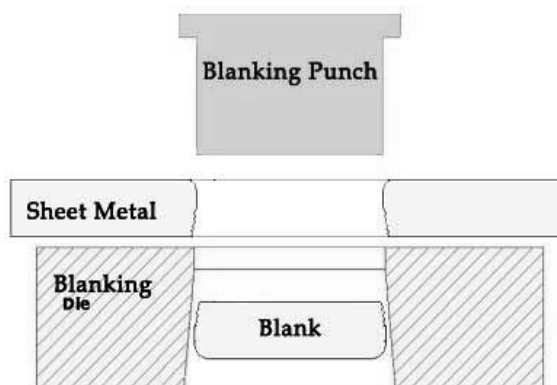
Schematic view of the blanking die, sheet metal and the punch
